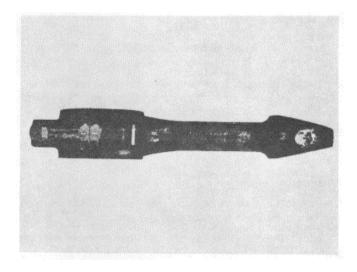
C-39. Connecting Rod and Cap Cylinder Number
